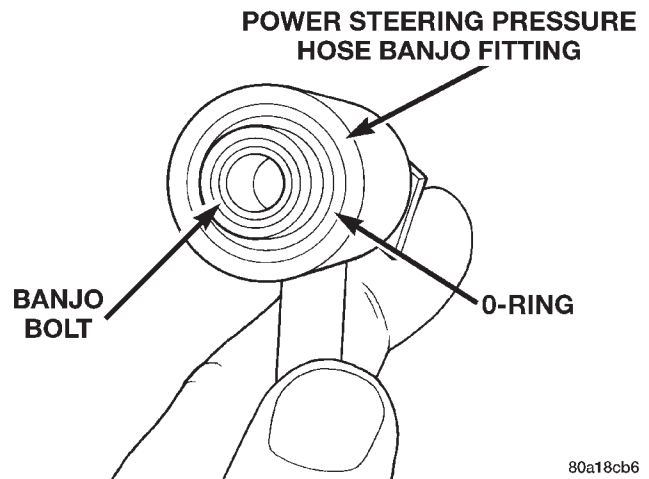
O-Ring Installed On Power Steering Hose Banjo Fitting
